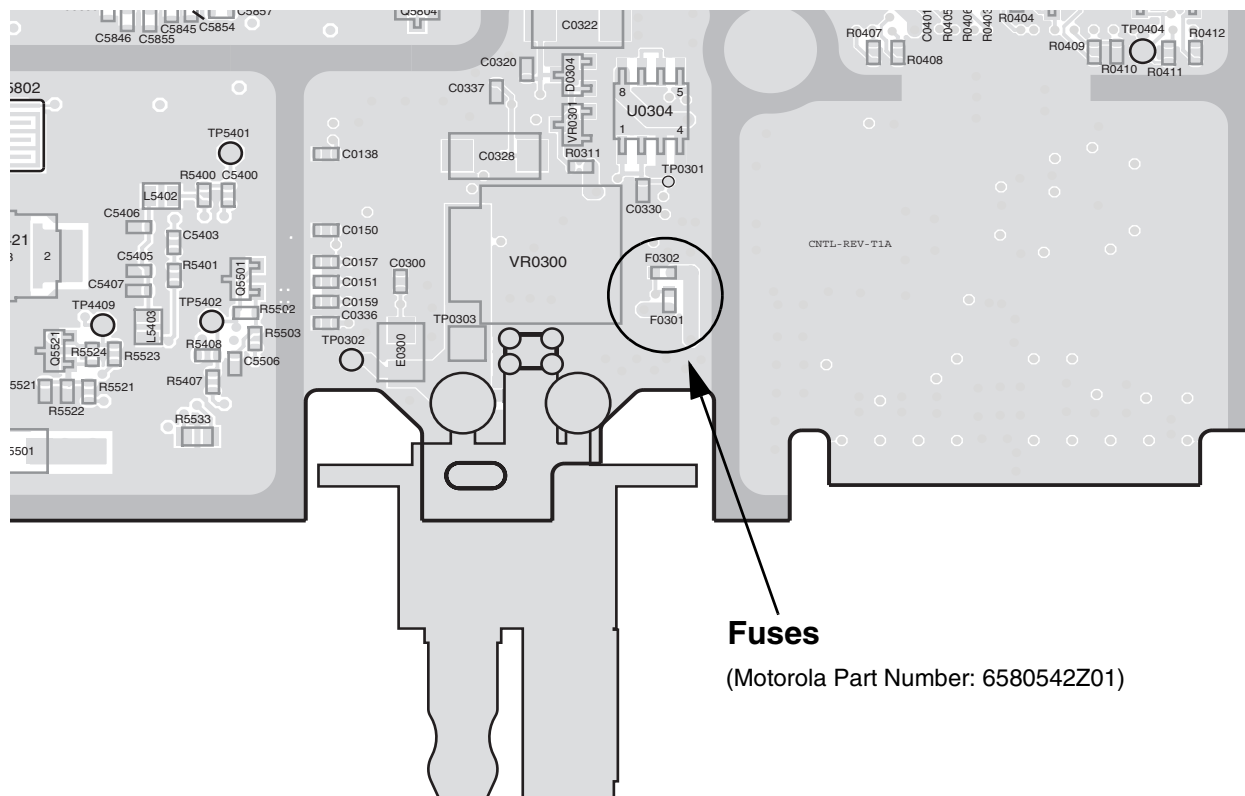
Position of Fuse F0301 and F0302 (PCB Mainboard - Bottom View)
